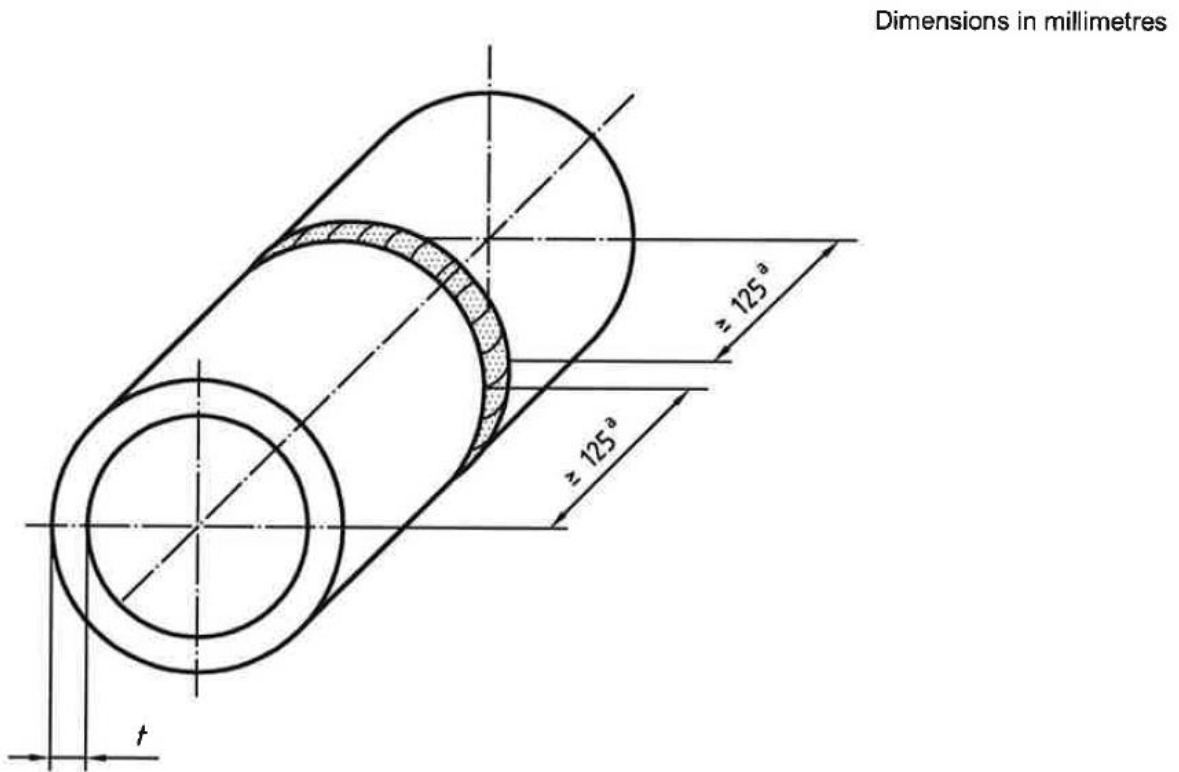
Test piece for butt welds in pipe; Note: $a \geq 150$ mm for materials of high thermal conductivity (e.g. aluminium and copper).
